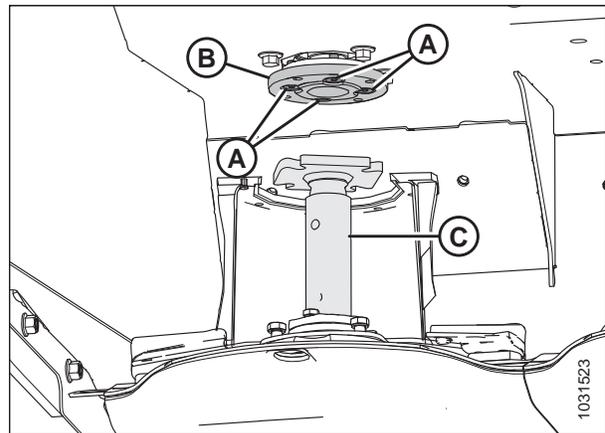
Cutterbar Endplate – Bottom View, Left End Shown, Right End is Opposite
